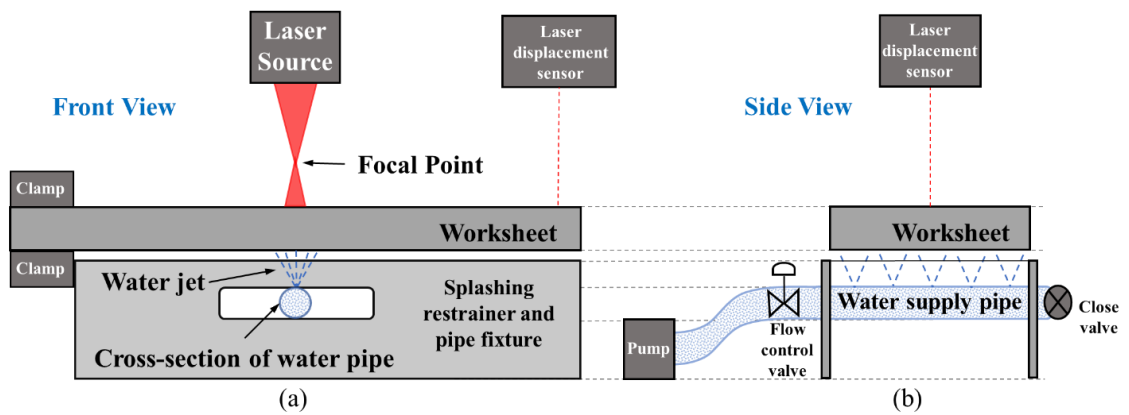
Schematic of experimental setup with forced cooling (a) front view and (b) side view
